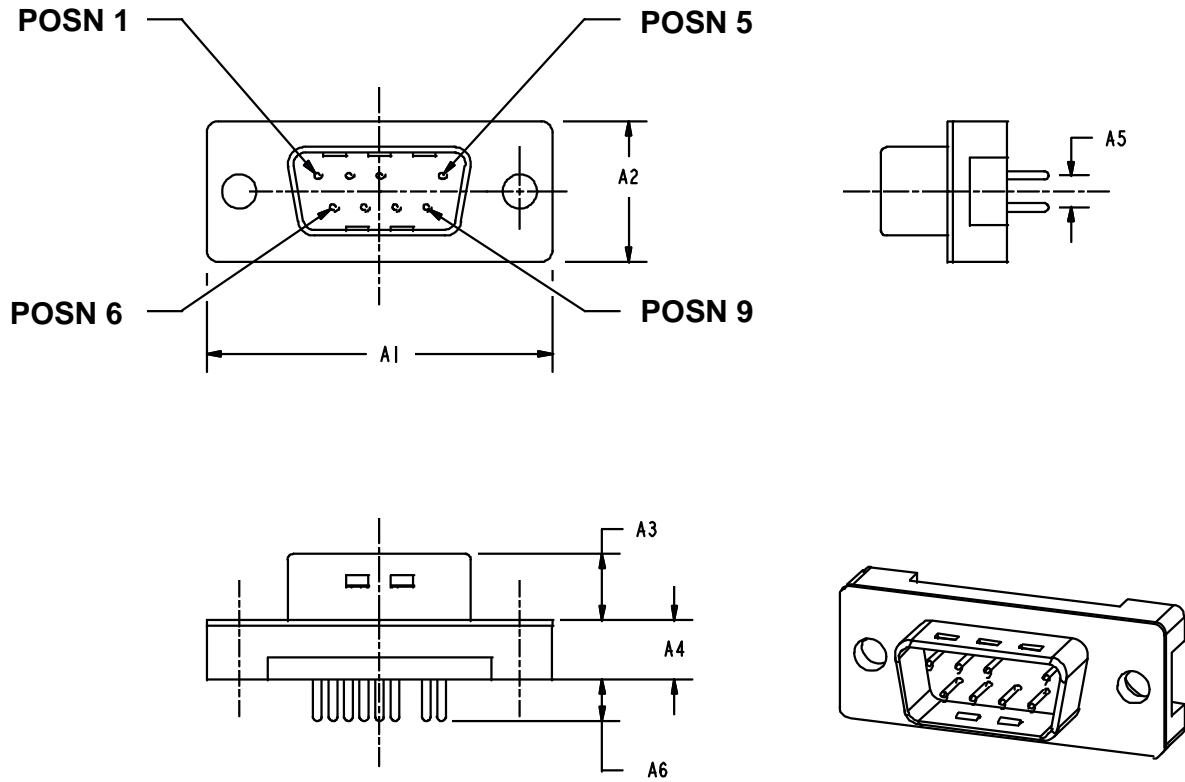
Free board straight thru hole (version 1) overview and outline dimensions
